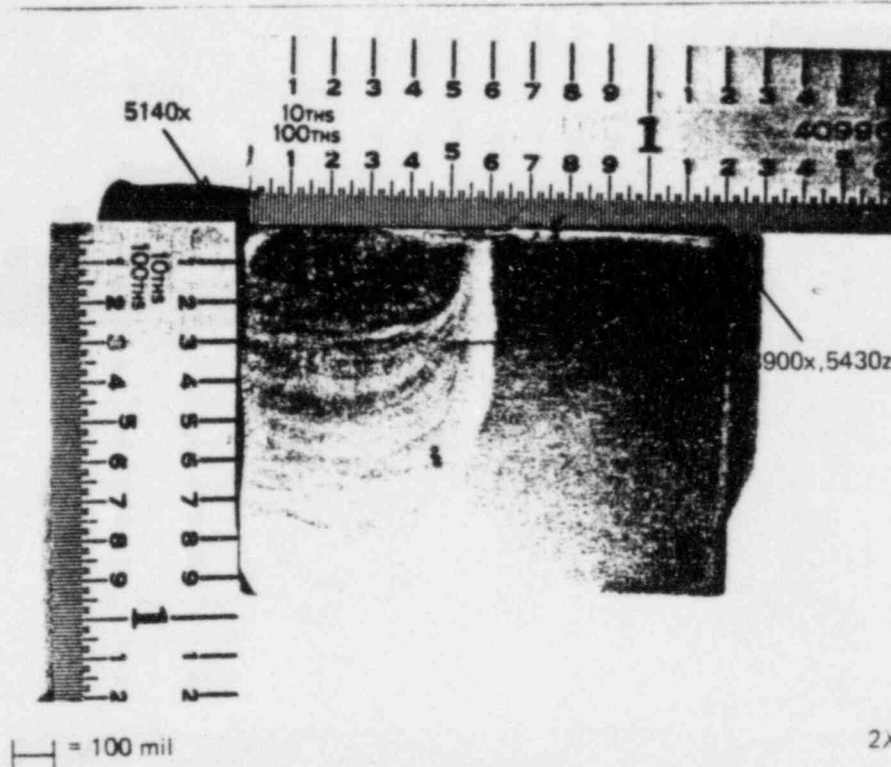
BUTT-WELDED CARBON STEEL PLATE -
